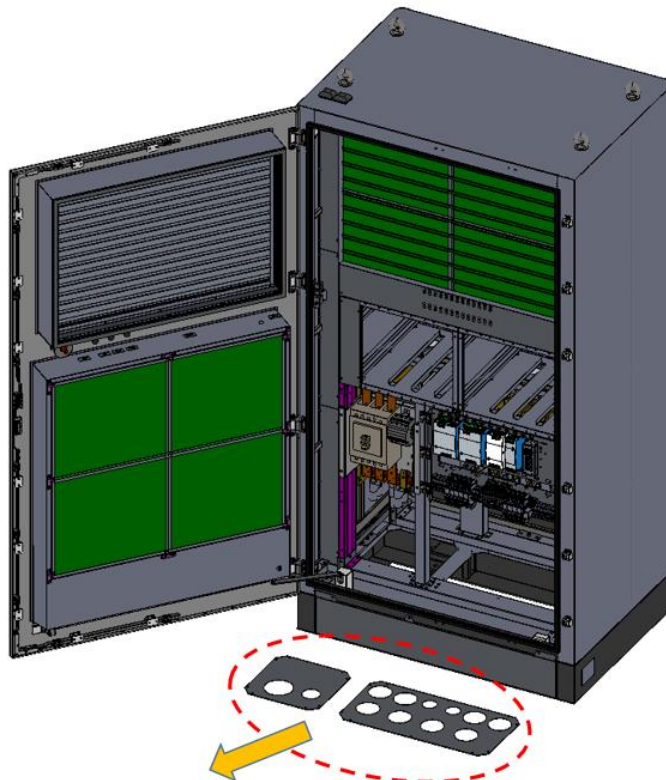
Diagram of removing the plates for AC and DC cable inlets
